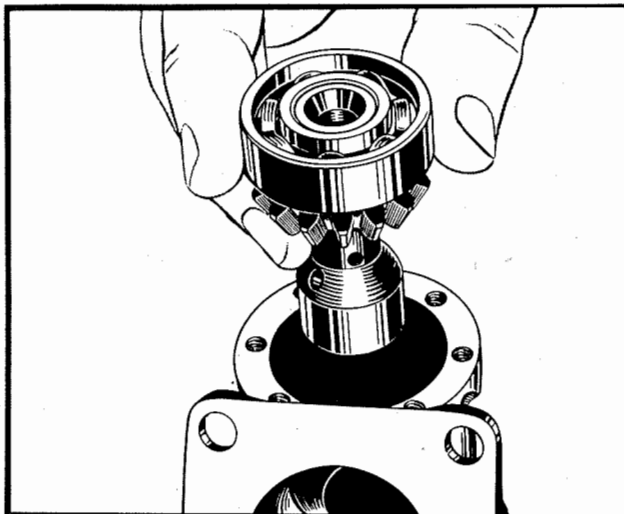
Inserting Shaft & Bearing Into Model 2 Base
